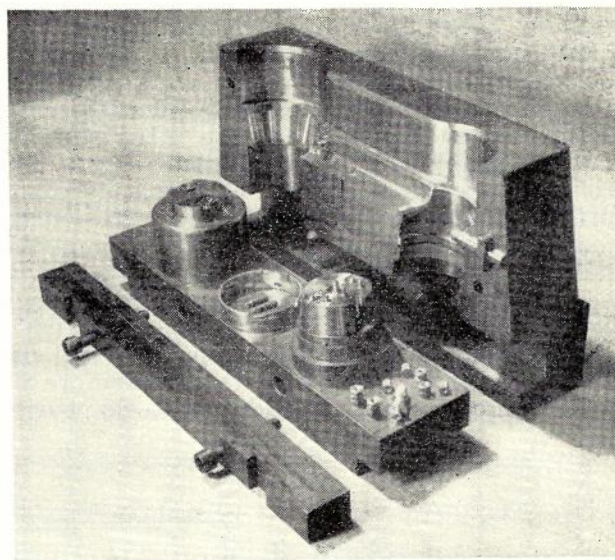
Transmitter and receiver housing component. Bottom force—split cavity and components.
